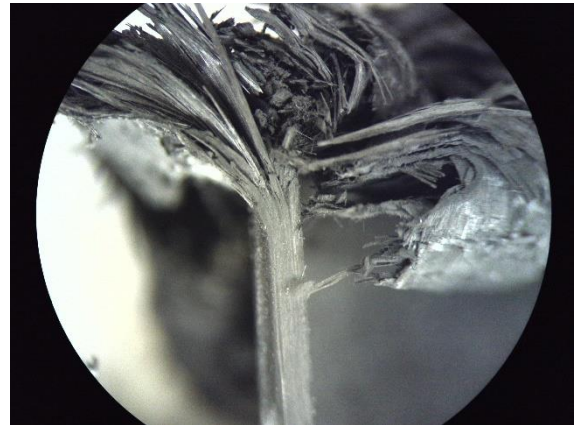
7 deg. loaded specimen. Peripheral section.
